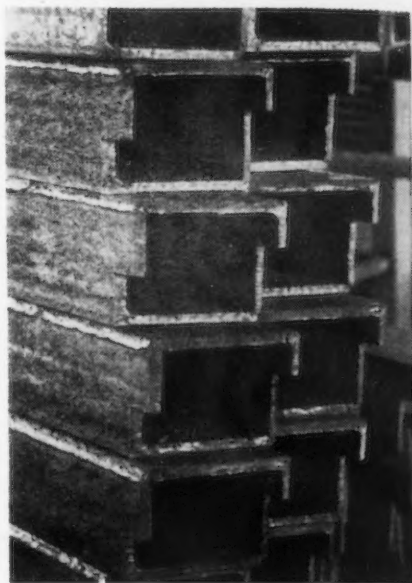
The major parts of this welded machine sub-assembly are square cut or nearly square cut and therefore are readily cut to fit correctly.
